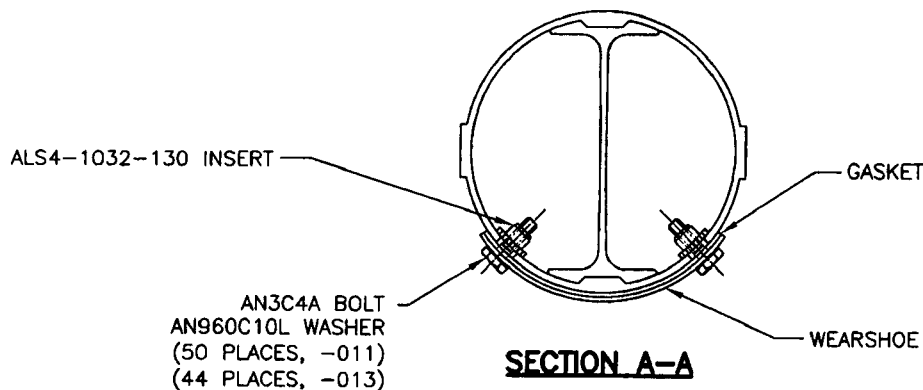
DSI9372-011/-013 WEARSHOE KIT INSTALLATION
